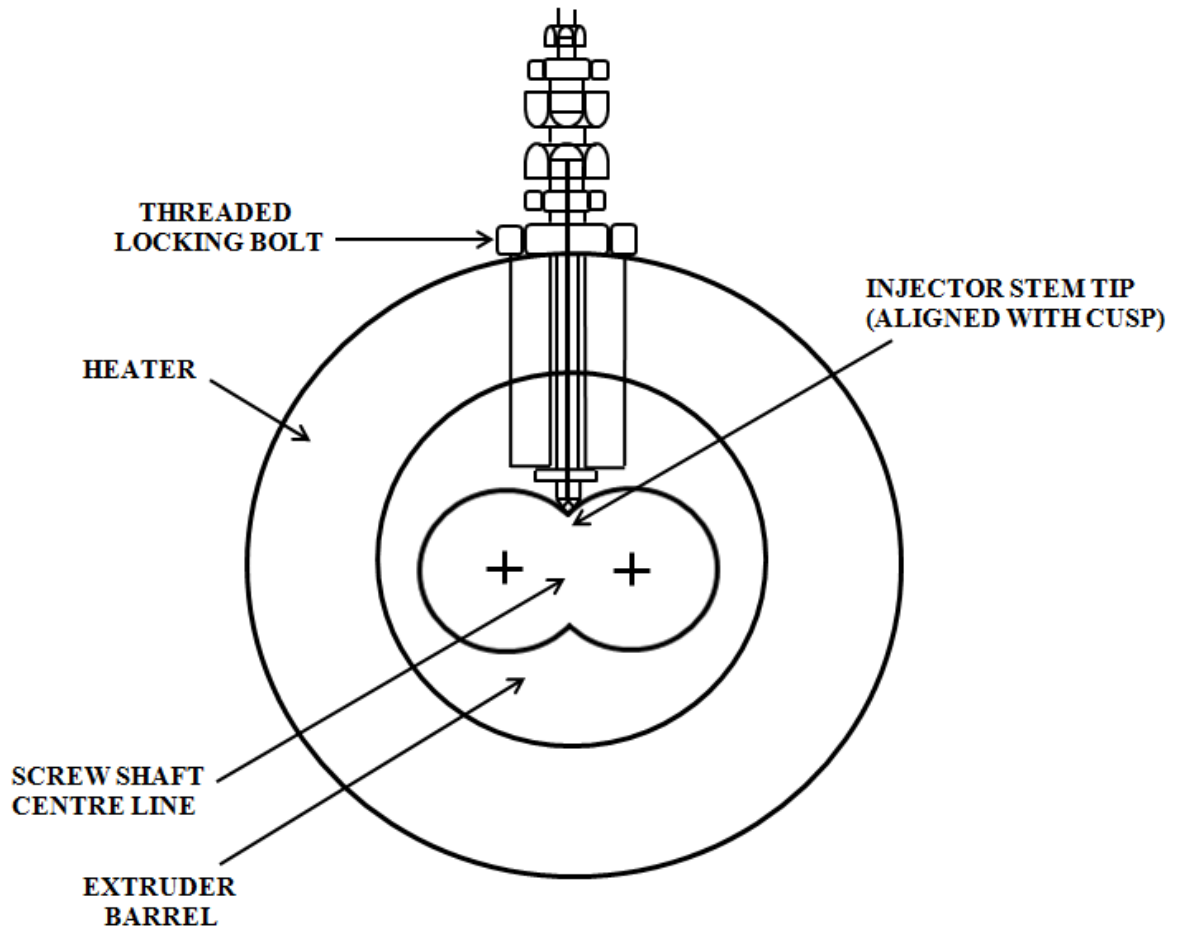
The Barrel Cross Section of a Twin-Screw Extruder Showing the Injection Location
